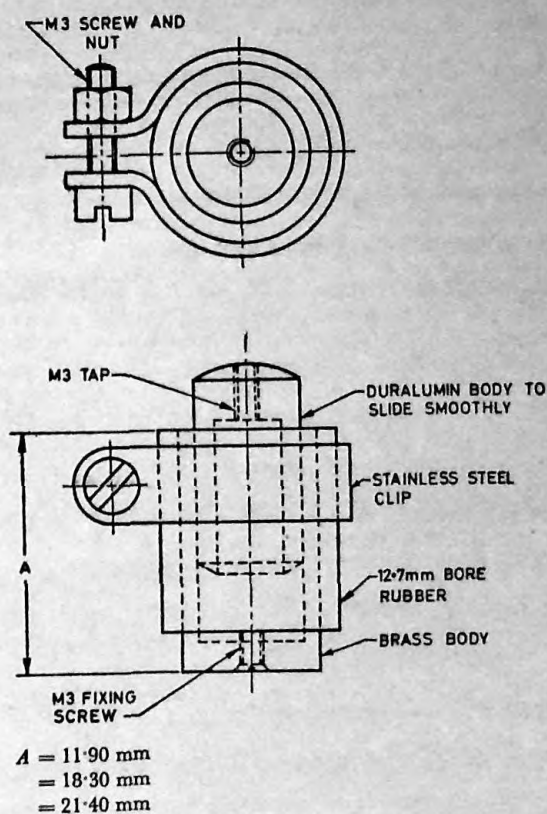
POSITION FOR MEASUREMENT OF CLEARANCE INSIDE THE BOOT
